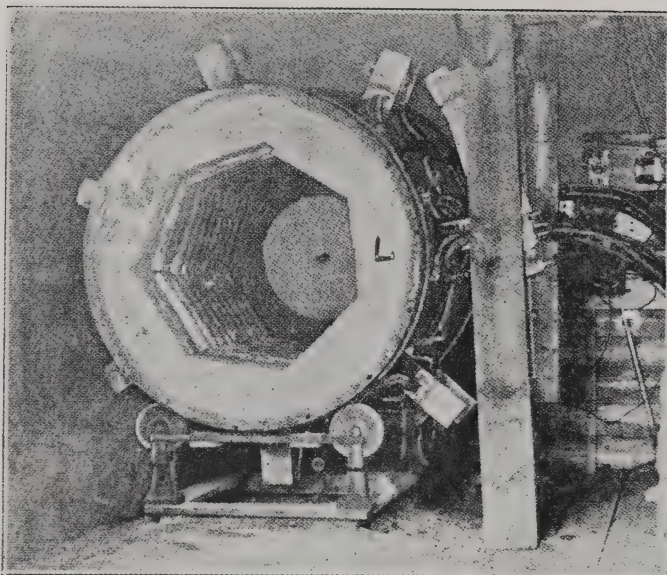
THE "HATCH" ELECTRIC FURNACE, SHOWN WITH ONE END REMOVED.
